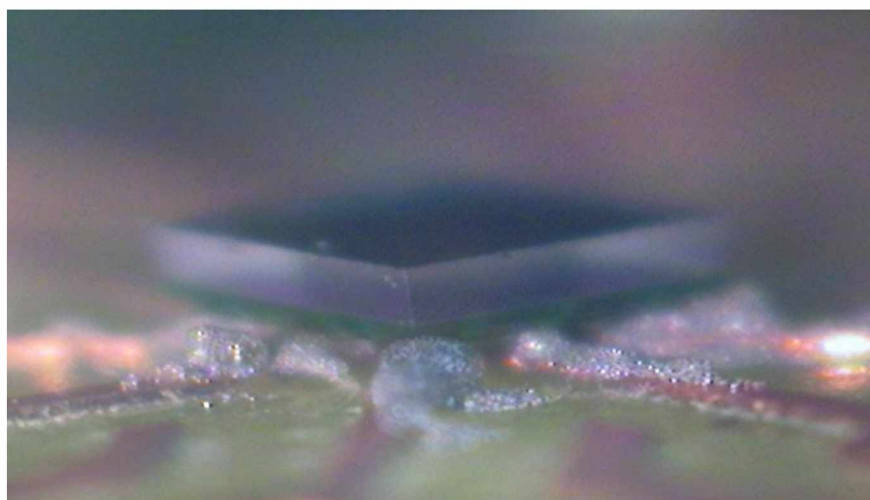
Close-up side view of the sensor attached to the circuit board.
